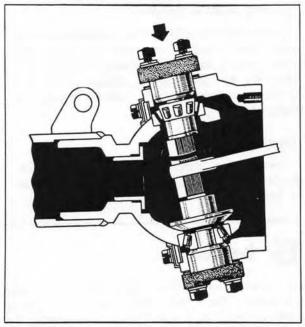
Knuckle Arm & Knuckle Bearing Installation
